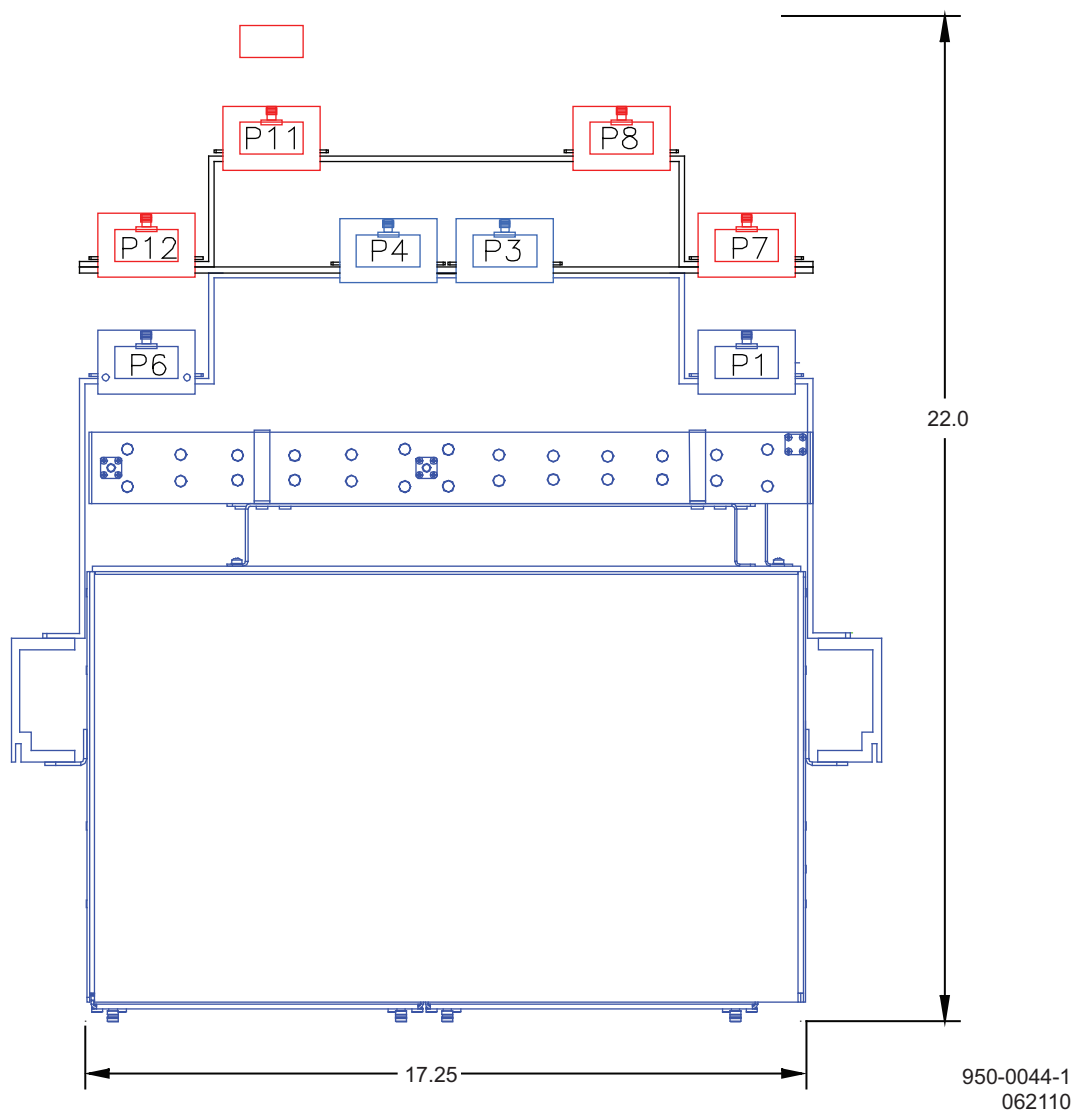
MPT-HL shelf w/diplexer dimensions - top view950-0041-1
